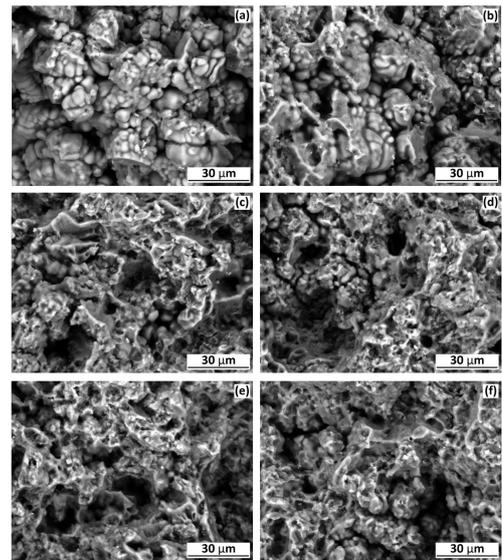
SEM images of the fractured surface of the die casting parts (3000 \times) for (a) Run 5, (b) Run 9, (c) Run 18, (d) Run 20, (e) Run 11, (f) Run 24.
